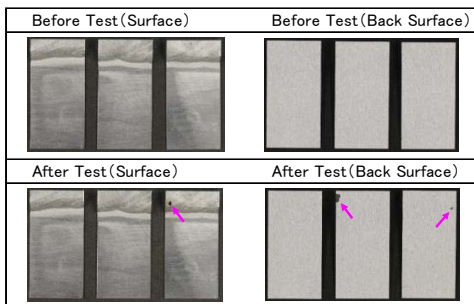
Results of pitting corrosion resistance tests (SUS329J3L-clad steel plate FCAW 44kJ/cm : 40°C)
